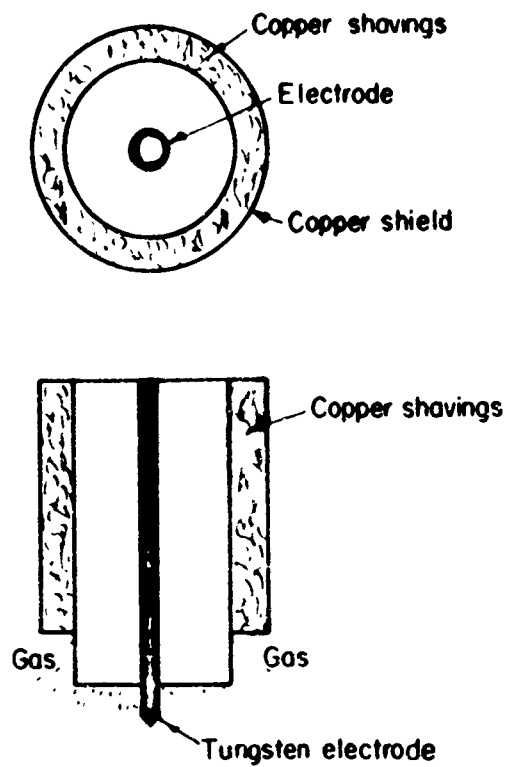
MODIFIED MANUAL TIG WELDING TORCH-SHIELDING NOZZLE (REF. 8)
